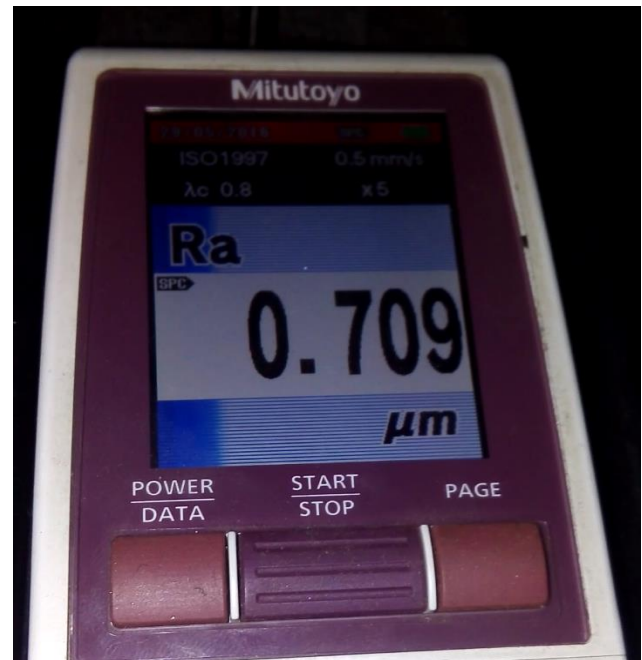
Optimum Value obtained by Mitutoyo Surface Tester after Burnishing
